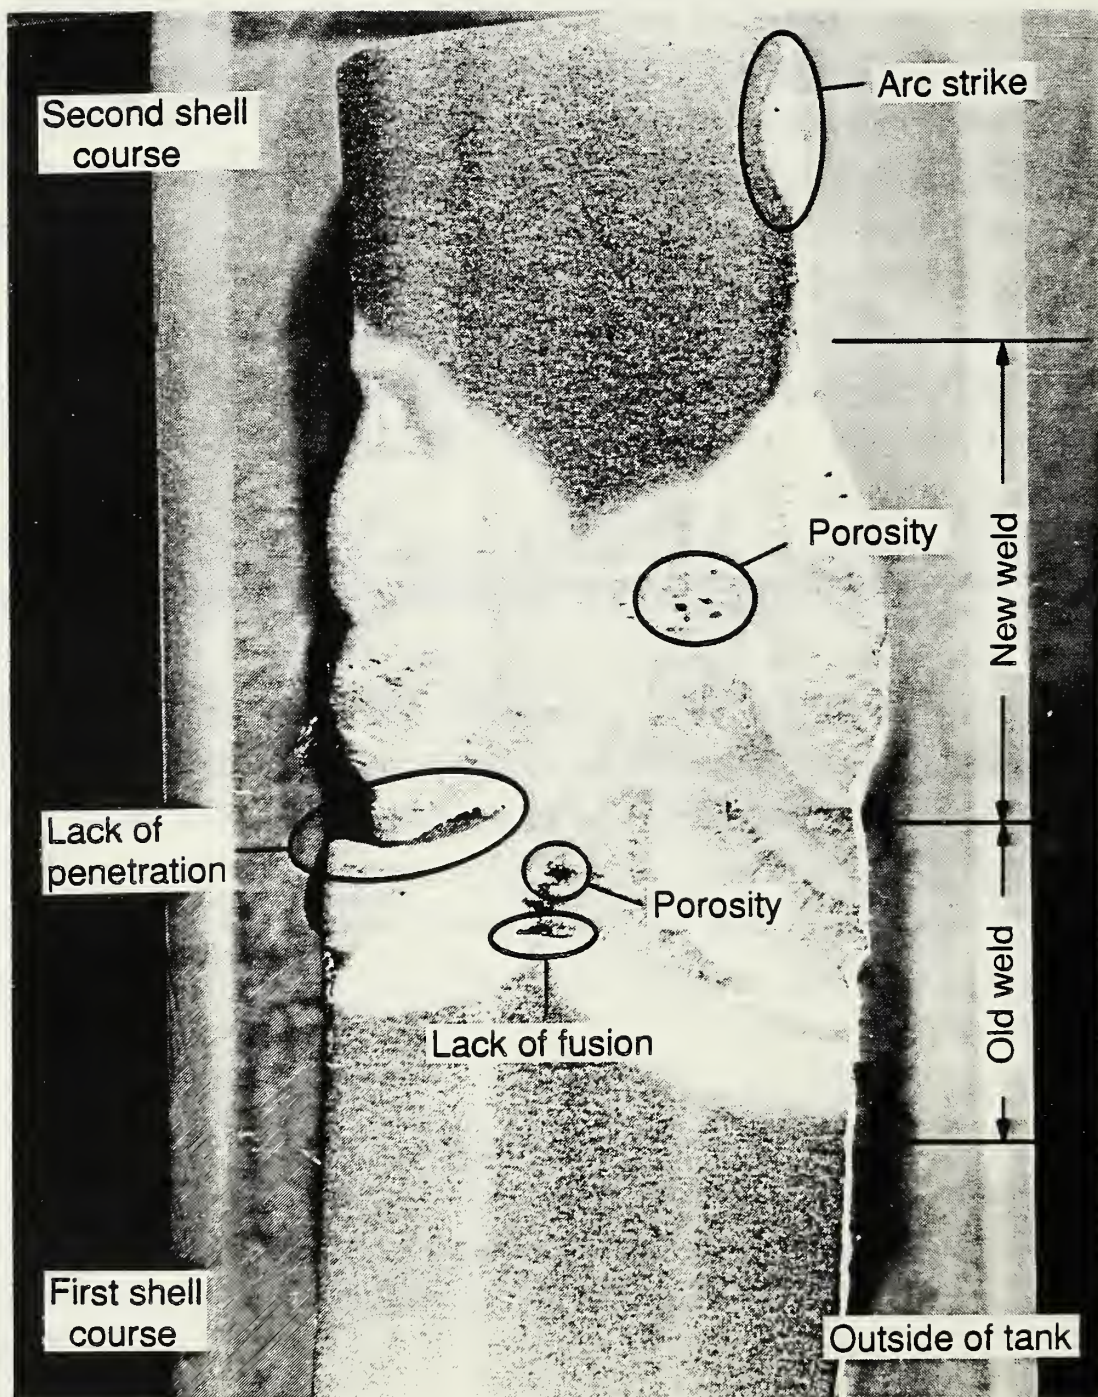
Defects in a Horizontal Weld between the First and Second Shell Courses
